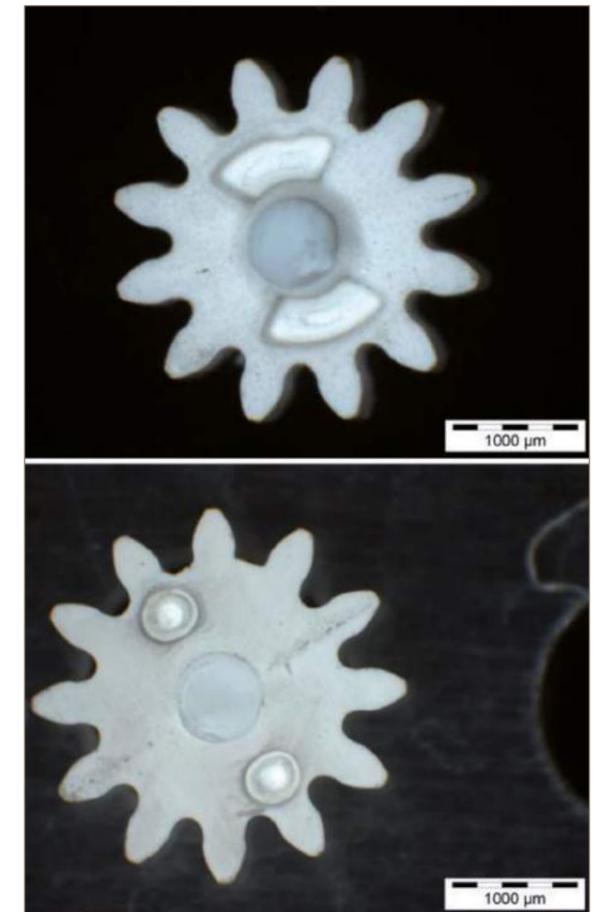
Green bodies of shaft-to-collar connections. Top: Former design with C-arc shaped gatings. Bottom: Actual design with point-shaped gatings. The upper part of the axle was broken away in both cases to enable a view at the gatings of the gear wheel
